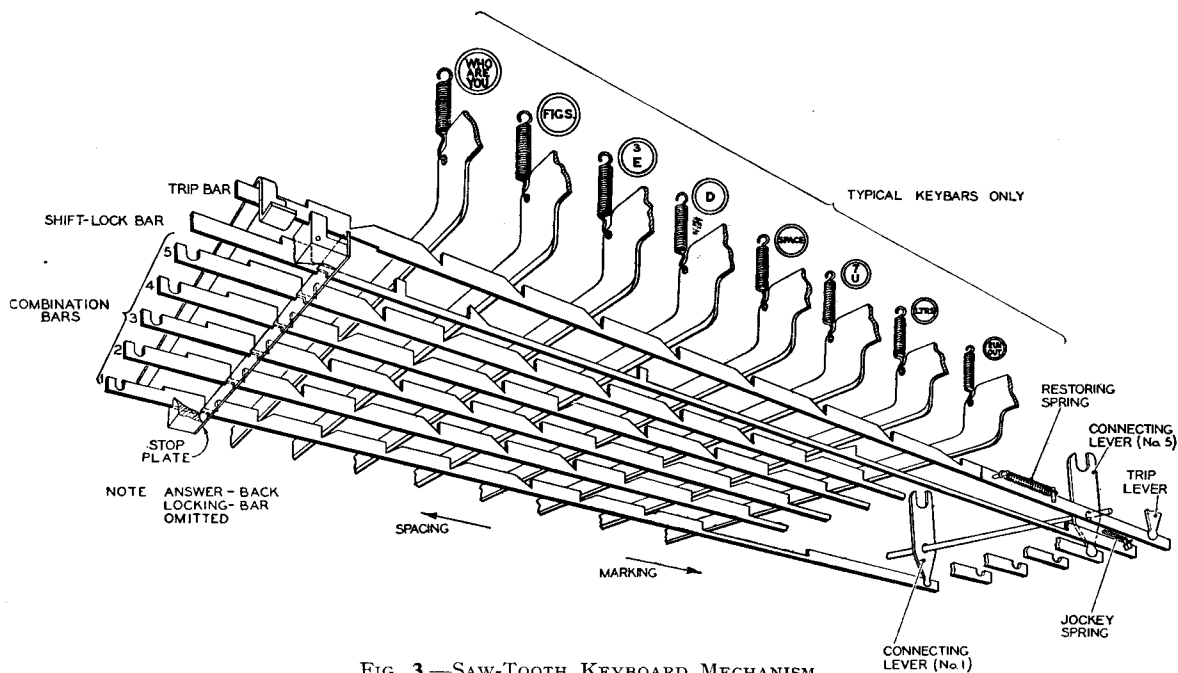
SAW-TOOTH KEYBOARD MECHANISM.
